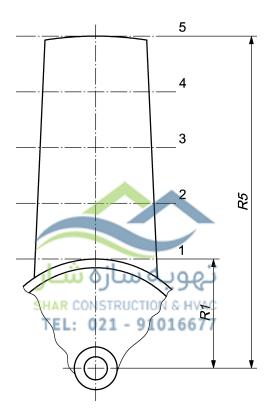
Axial impeller, blade divided into four parts using five sections
